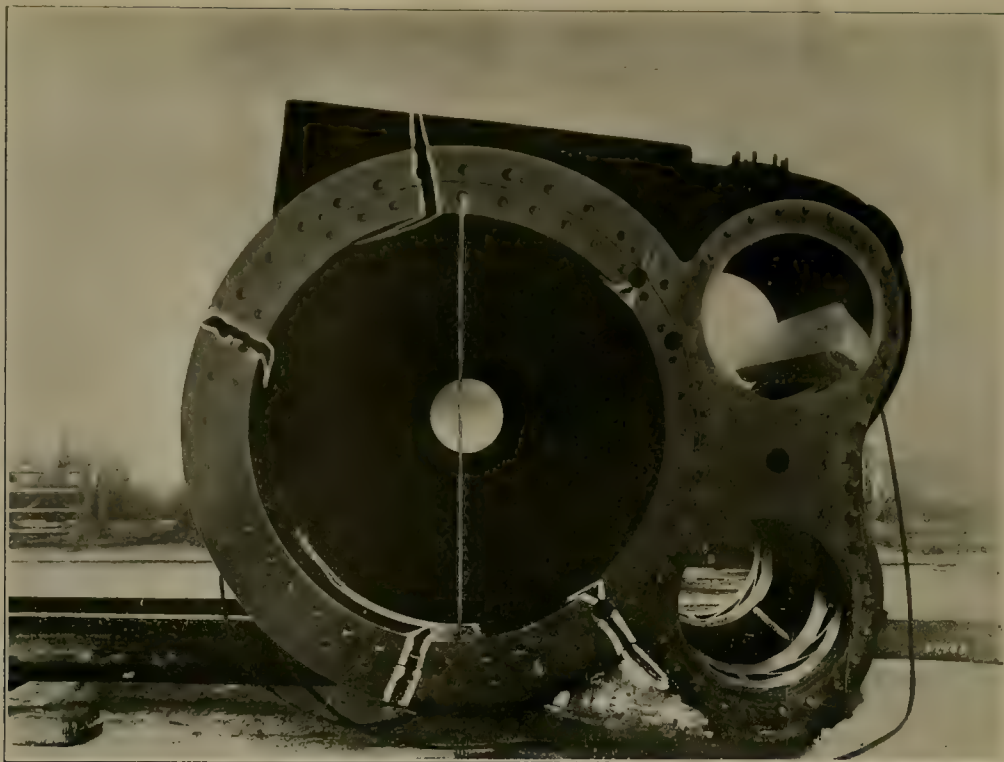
WELDING WITH THE OXY-ACETYLENE FLAME: THE FRACTURED STEAM-CYLINDER
